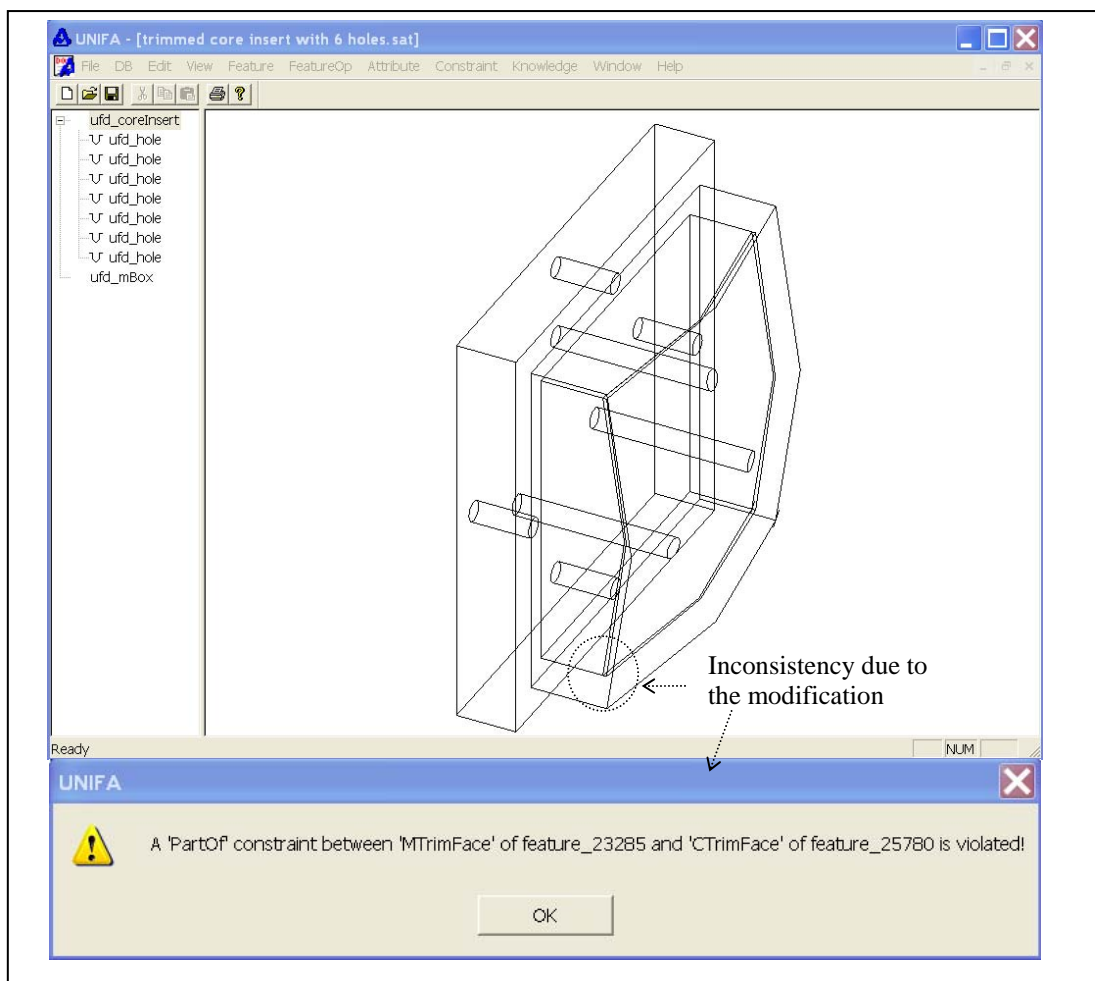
The core insert is inconsistent with the moulding due to the modification
